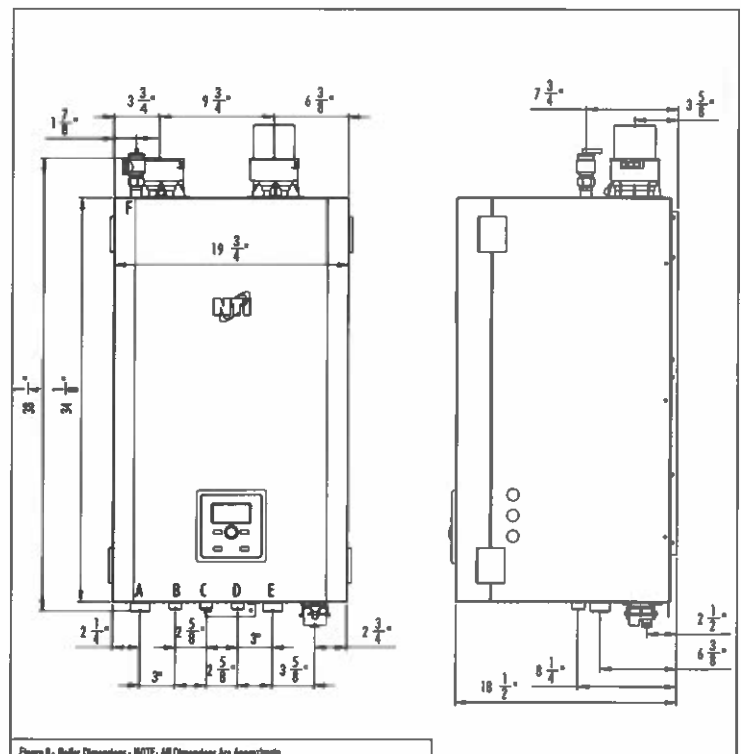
Boiler Dimensions - NOTE: All Dimensions Are Approximate
